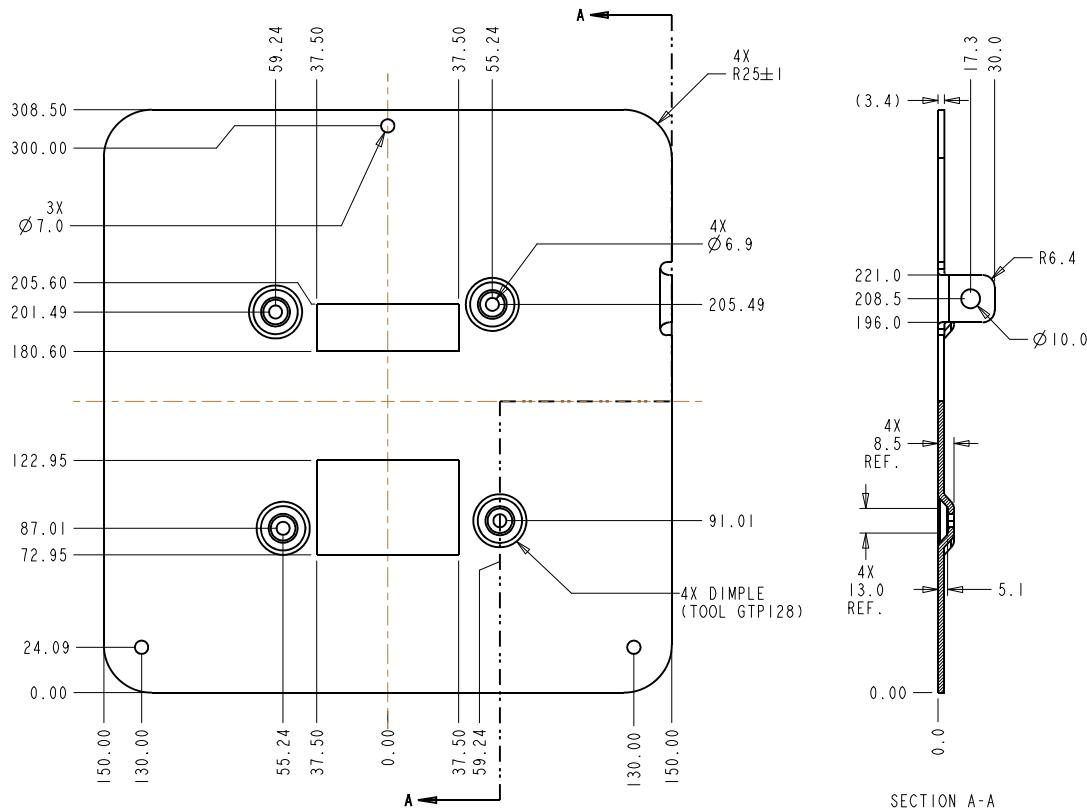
SMART-MR10/15 Mounting Kit, AG GPS 262 (01018623)
